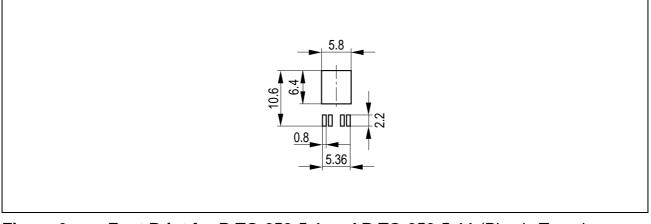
Foot Print for P-TO-252-5-1 and P-TO-252-5-11 (Plastic Transistor Single Outline
